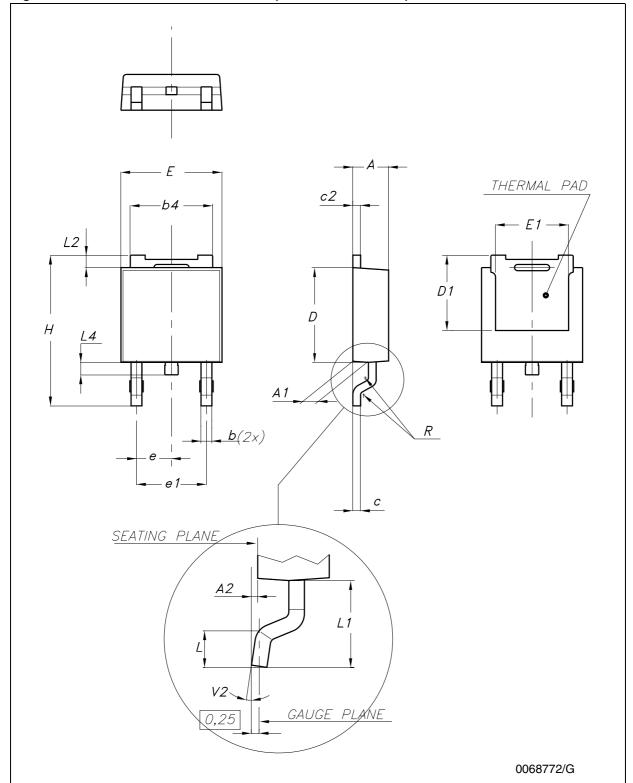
DRAWING DIMENSION DPAK (TYPE IDS-SUBCON.)
